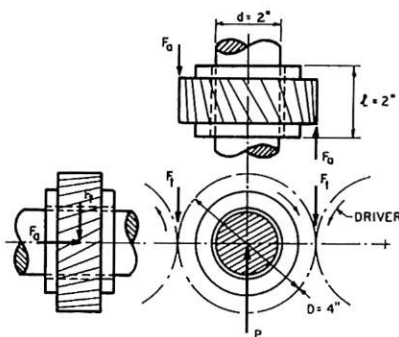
IDLER GEAR WITH HELICAL TEETH HAVING AXIAL TOOTH-FORCE COMPONENTS PRODUCING TWISTING MISALIGNMENT
